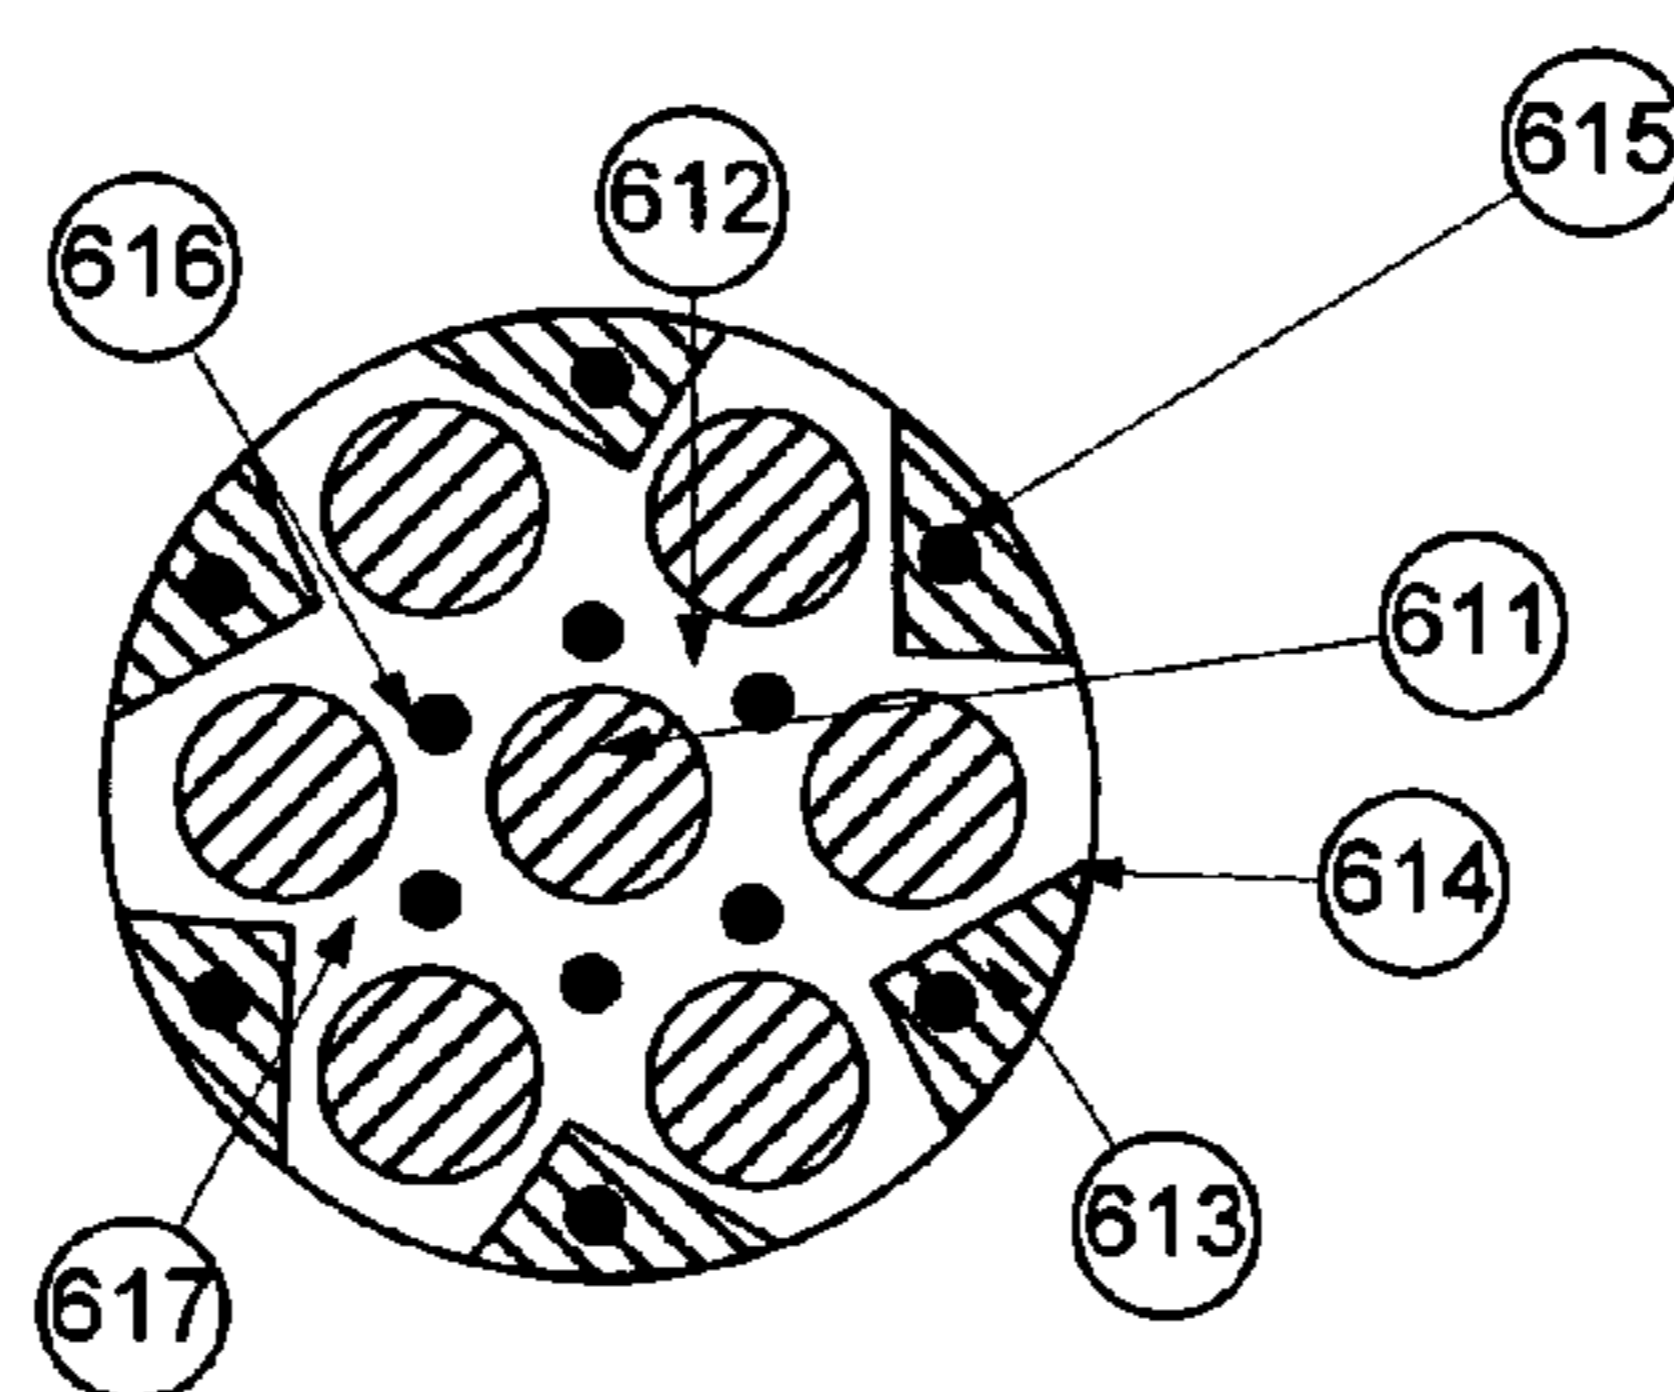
Cross-sectional view of a protective tube layout showing axial flow baffles and spacers and use of spacers as extended surface area
